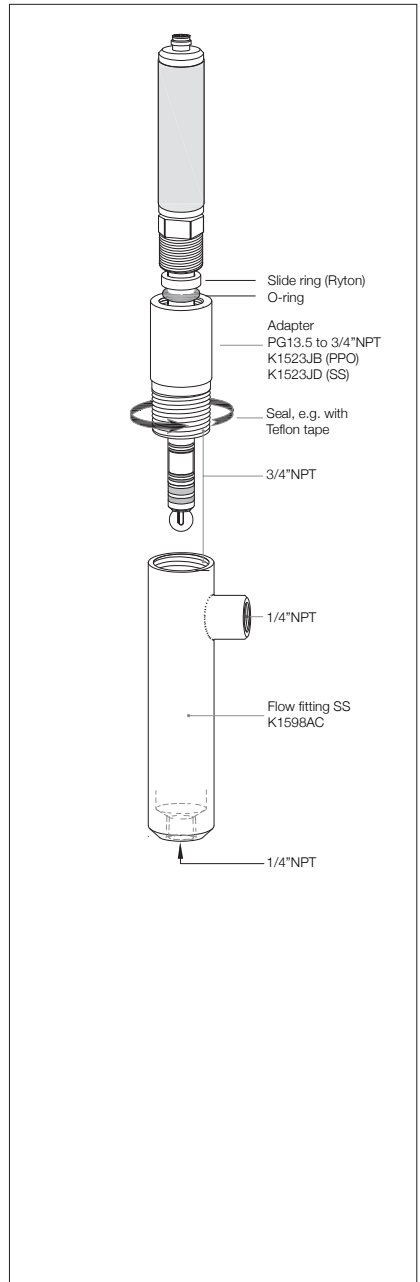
Mounting of sensor in fitting K1598AC, using adapter K1523JB / K1523JD
